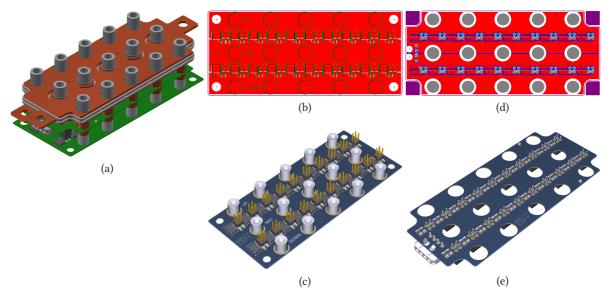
(a) CAD rendering of the assembled power part, (b) layout of the Power PCB, (c) CAD rendering of the Power PCB, (d) layout of the Gate Routing PCB and (e) CAD rendering of the Gate Routing PCB.
